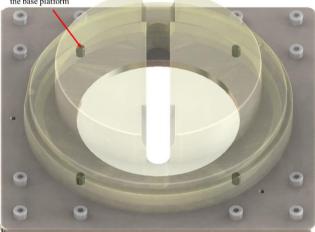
Disc fixture with a circular Figure 4-9: Four guiding pins on the base platform, closely fit inside the circular slot of the fixture and thus guiding rotation.
